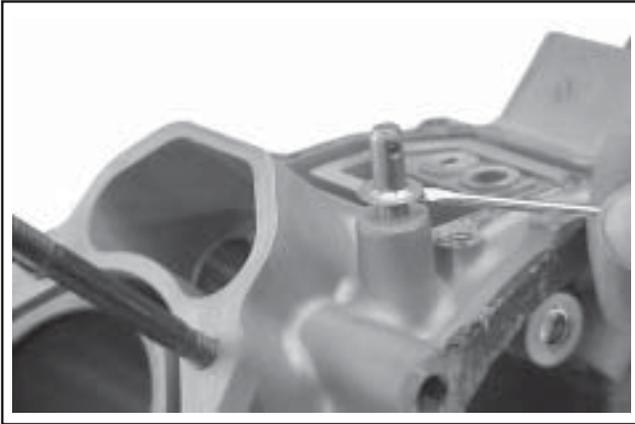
Removing Governor Shaft Retaining Ring and Washer.
